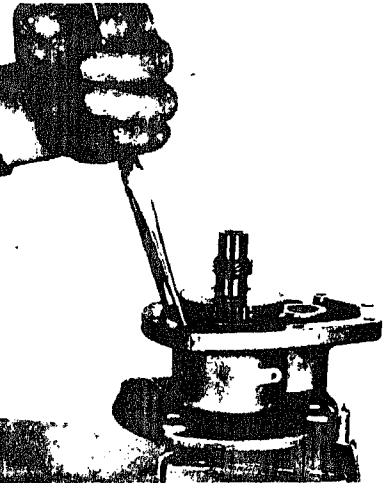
Assemble ST-419 oil seal tool over main shaft
